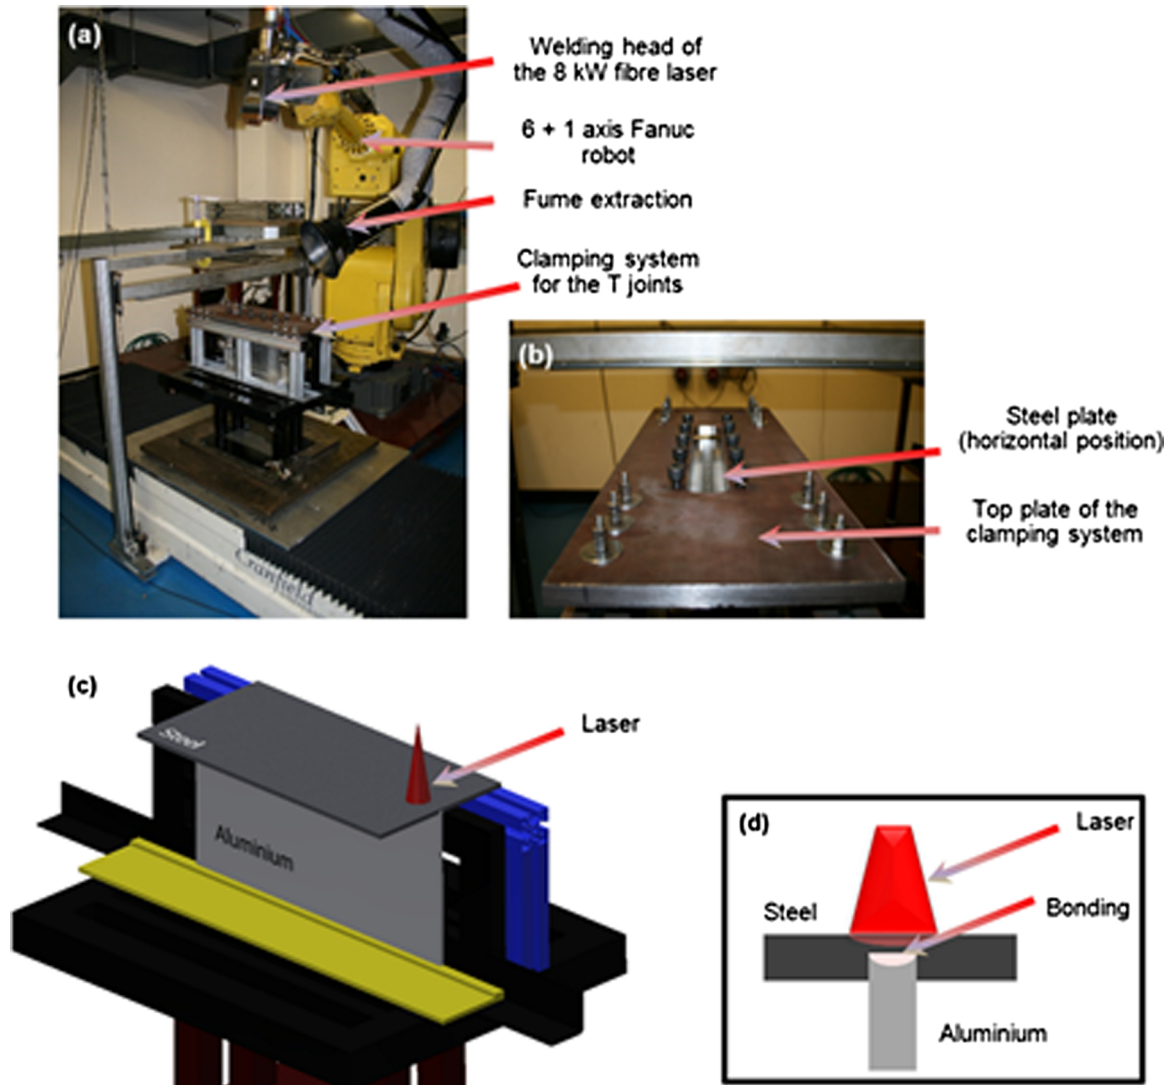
Experimental setup for laser welding of steel to aluminium in a T joint configuration. (a) General view of the setup, (b) top view of the clamping system, (c) schematic representation of the substrate positioned on the clamping system and (d) schematic representation of the welding process.
